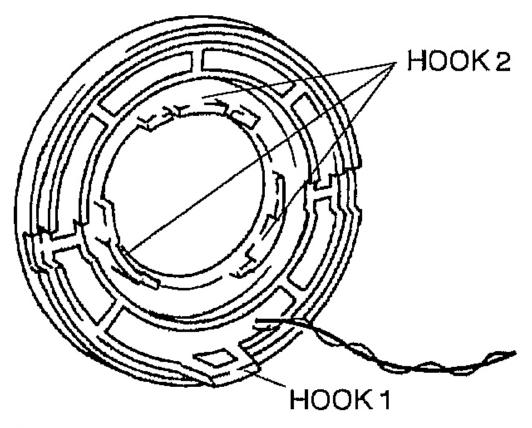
Removing Coil Courtesy of MAZDA MOTORS CORP.
